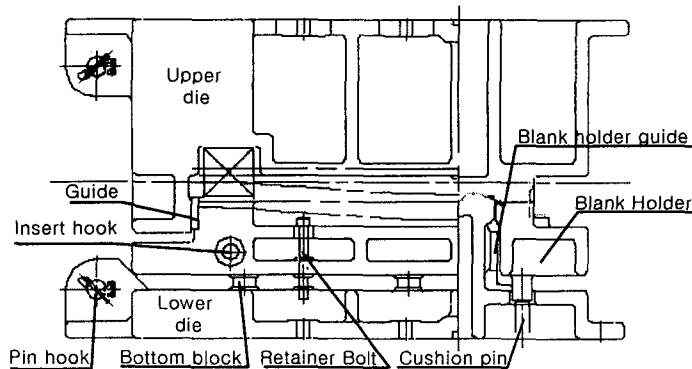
Schematic drawing of basic die structure for bonnet drawing
